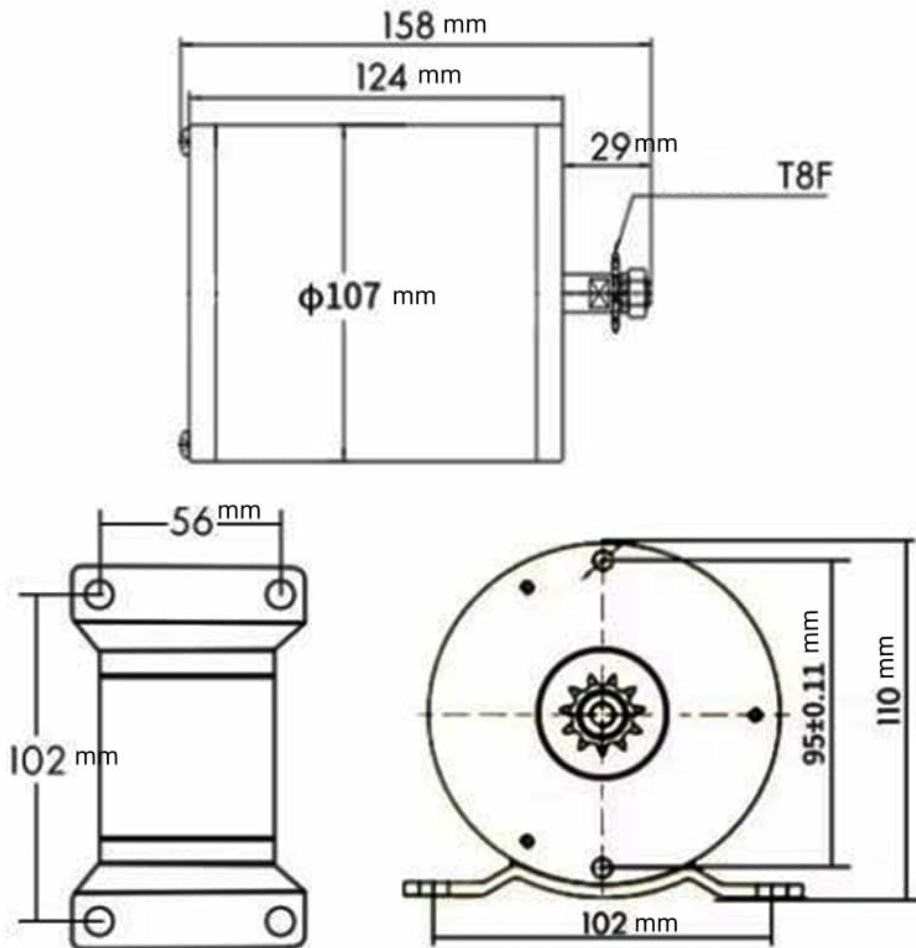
Dimensional drawing of the 36V 1000W Brushless DC Motor.
